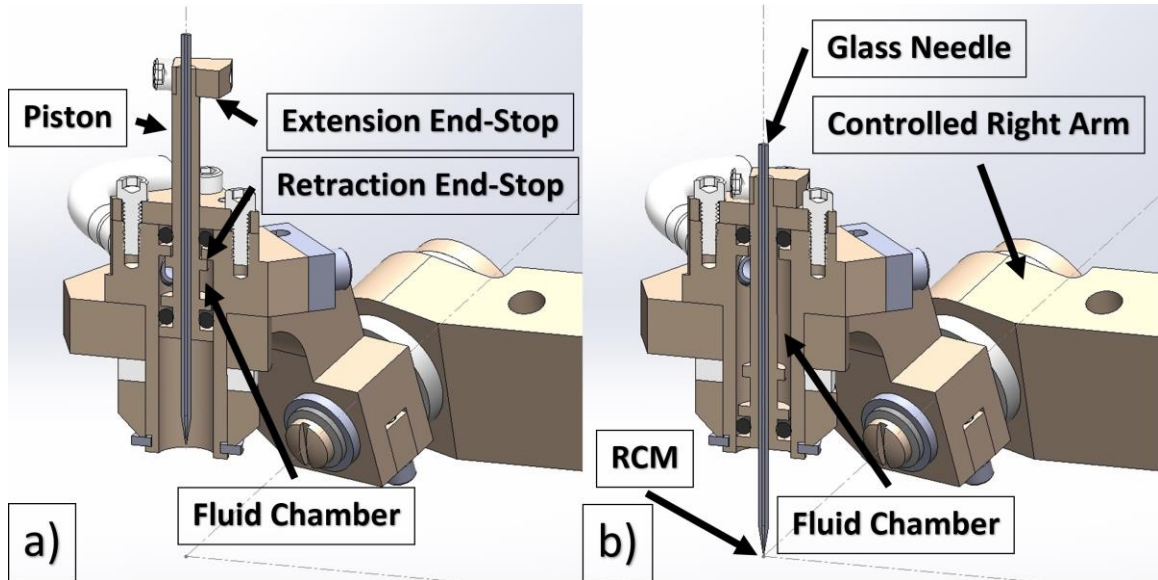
A cross-section CAD model view of the hydraulic needle manipulator (a) retracted and (b) extended to each hard-stop. The needle tip is retracted into the hydraulic housing for clearance (a) while the linkage and mouse bed manipulator are being manipulated to prevent damage to the needle, and (b) the needle is then extended to the RCM during the needle delivery procedure.
